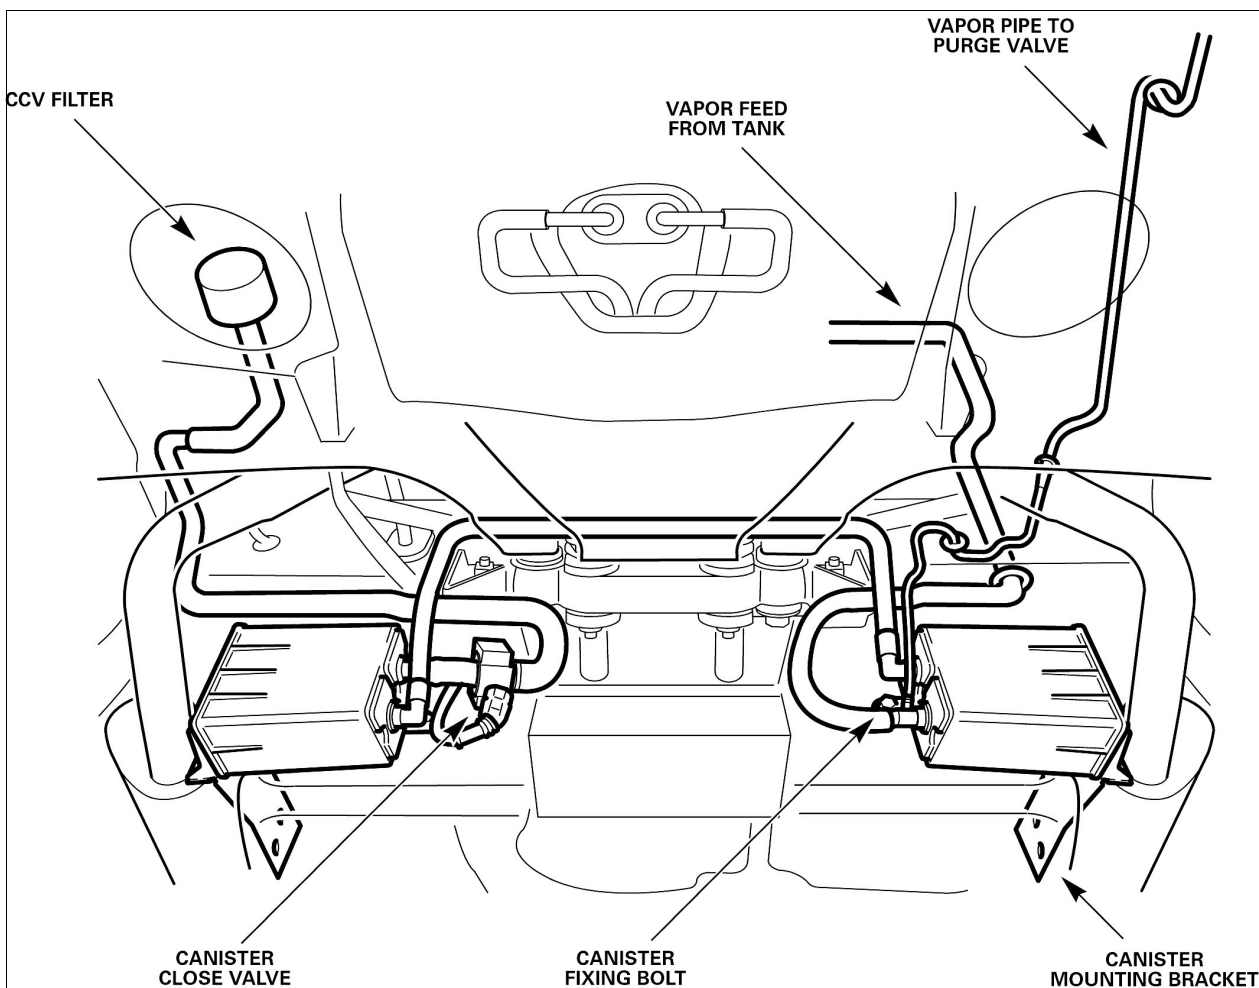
EVAP CANISTER INSTALLATION – XK8
